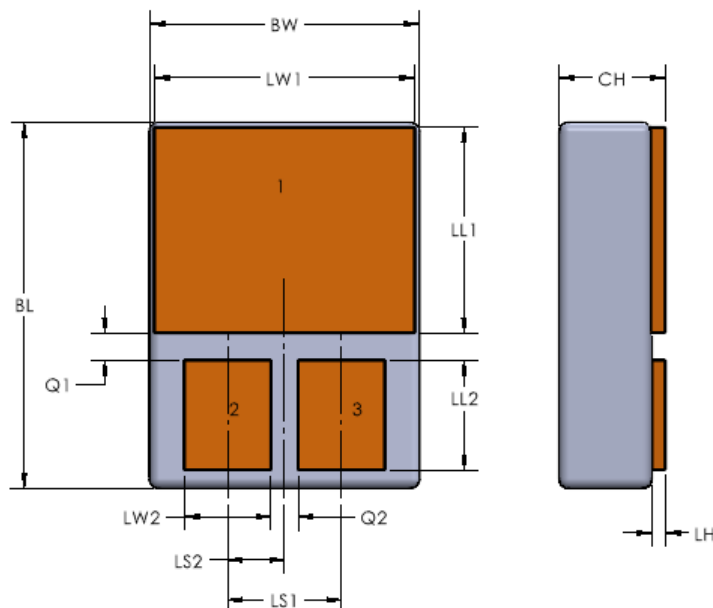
Dimensions and configuration of surface mount (TO-276AA, SMD-0.5) package.
